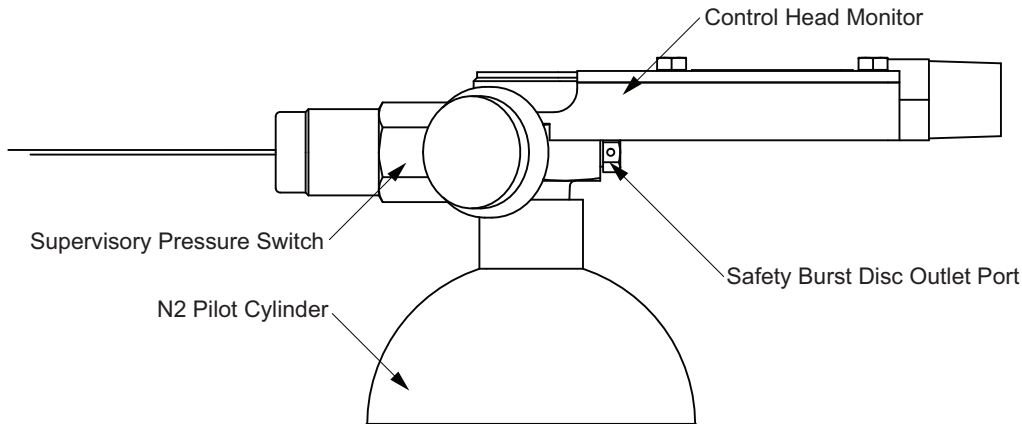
Control Head Monitor and Pilot Cylinder, Side View
